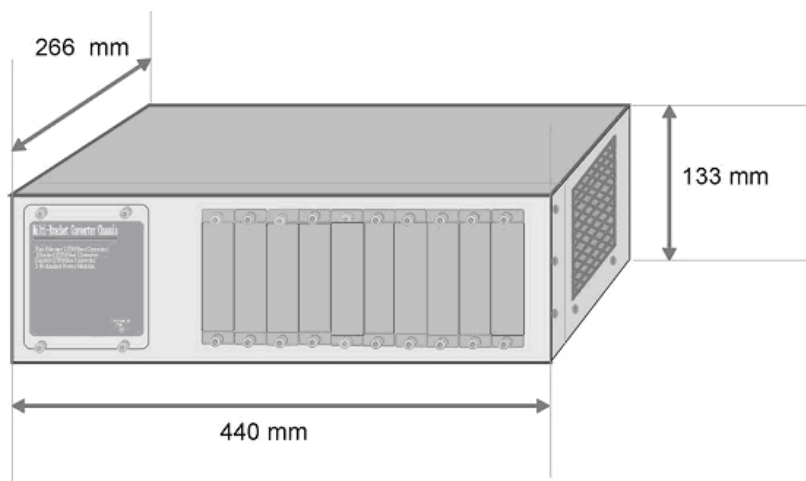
Physical Dimensions of the Raven Converter Chassis
